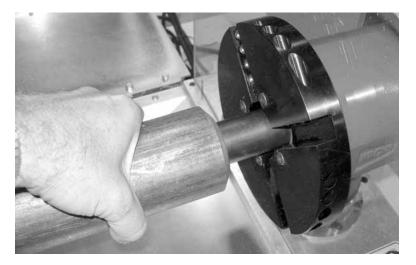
Put the pipe over the mandrel far enough so that all 6 clamping legs are inside the pipe.
